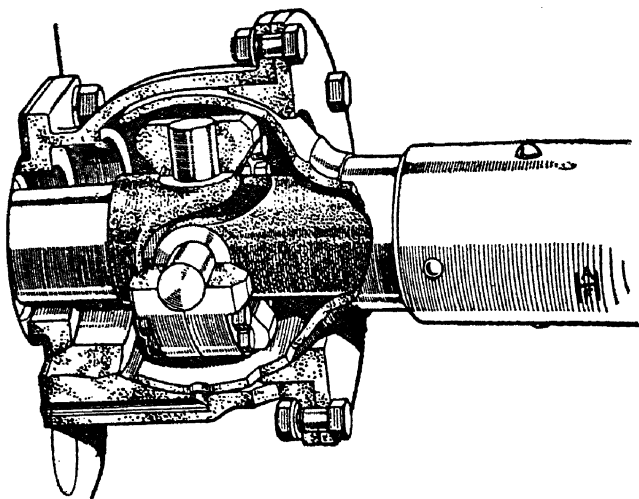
Type of Universal Joint that has been used on Morris Cars, with Enclosed Propeller Shaft Drive.
